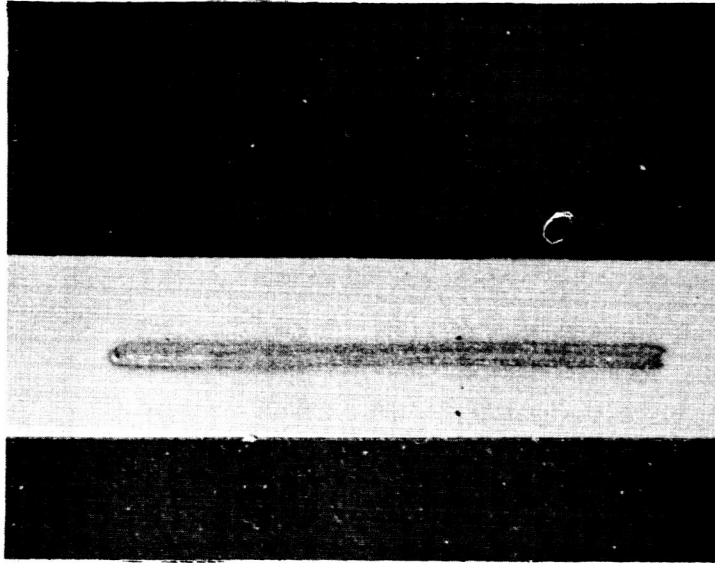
Photomacrograph revealing Rene' 41 seam weld. Weld schedule: 1.99 volts, 12 lbs. pressure, 30 inches/minute speed. 1X
